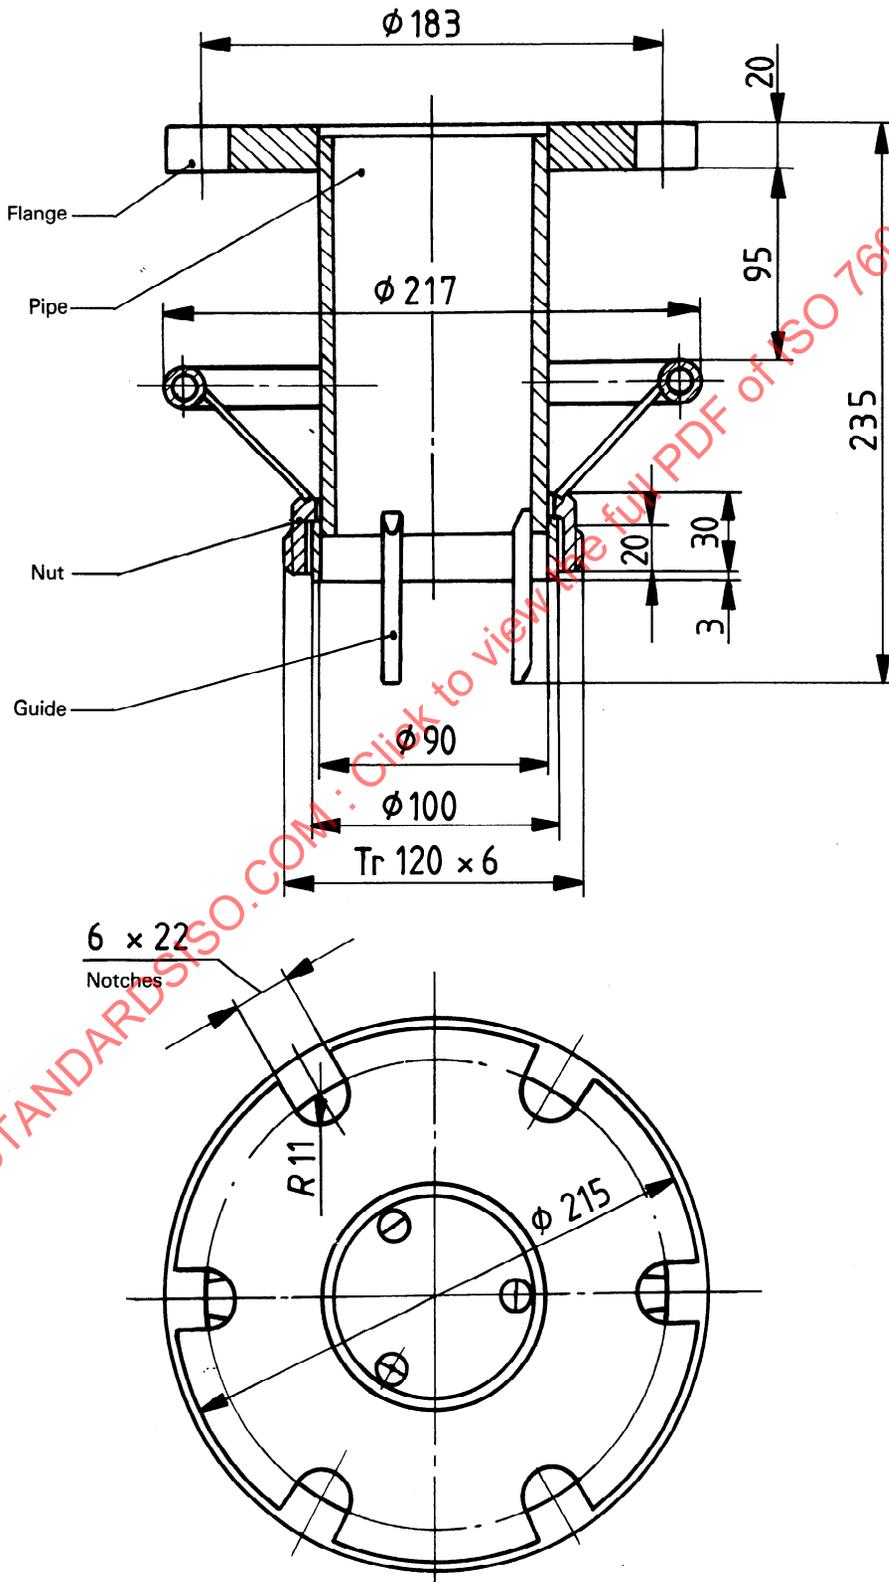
DN 80 adapter of type 3 (flange/end-piece) for the disposal of oily mixture
